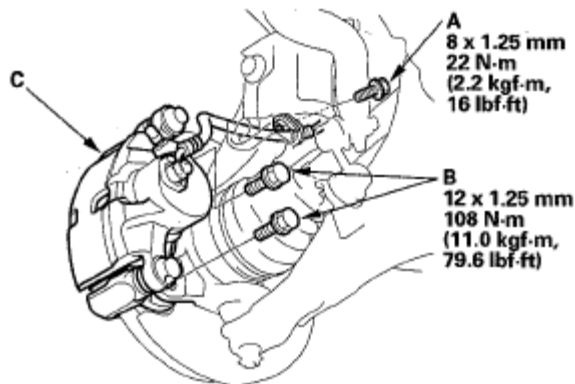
Identifying Brake Hose Bracket Mounting Bolt With Torque Specifications
